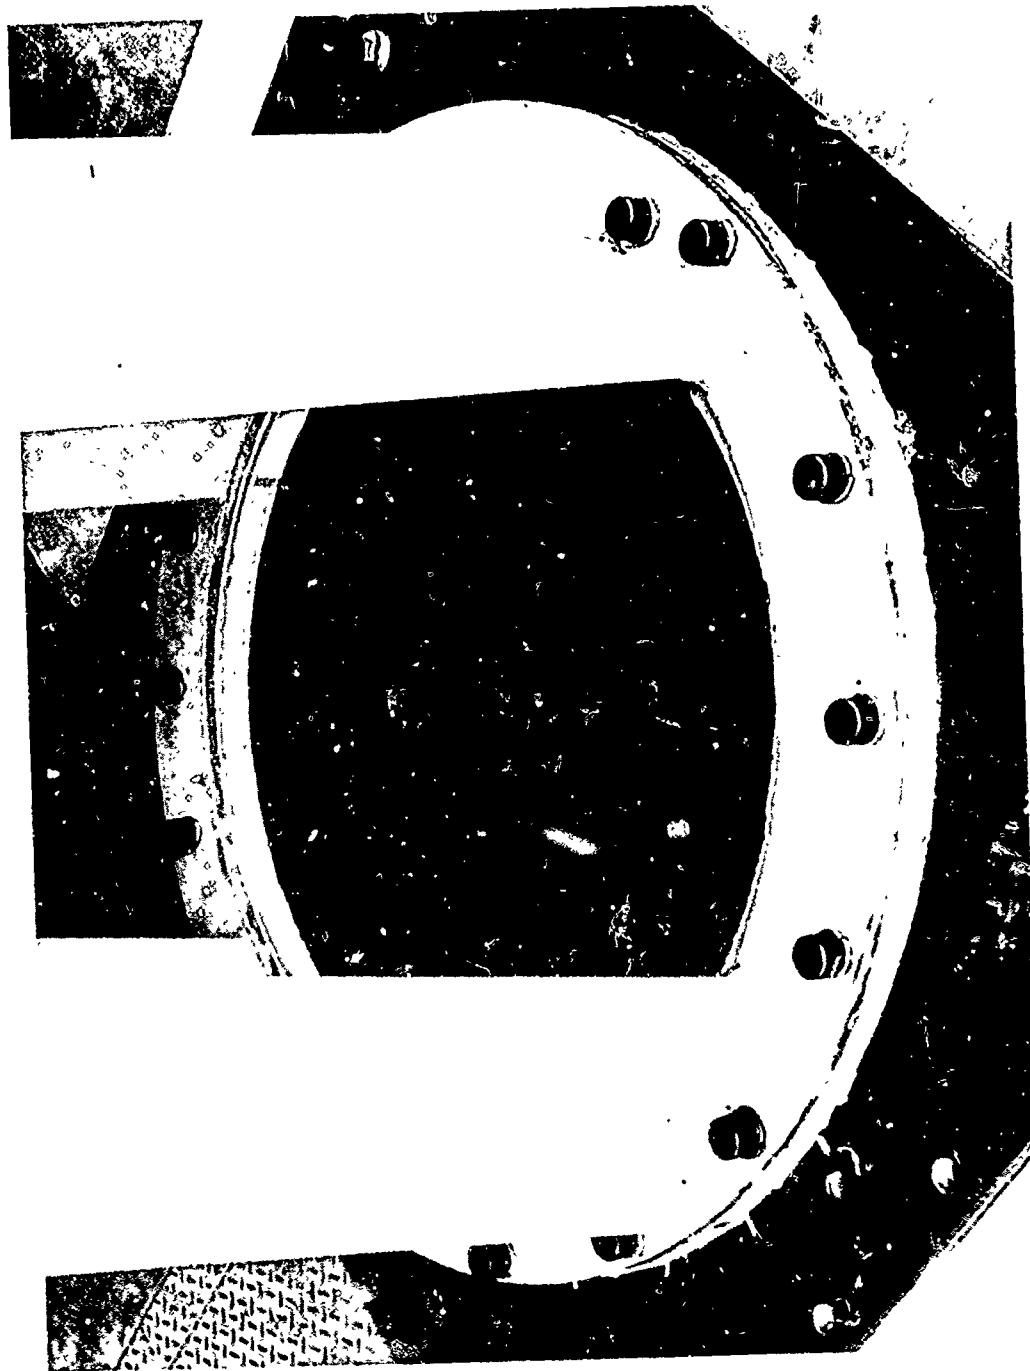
Mounting ring and chock pads of Test Structure 2 before disassembly.
